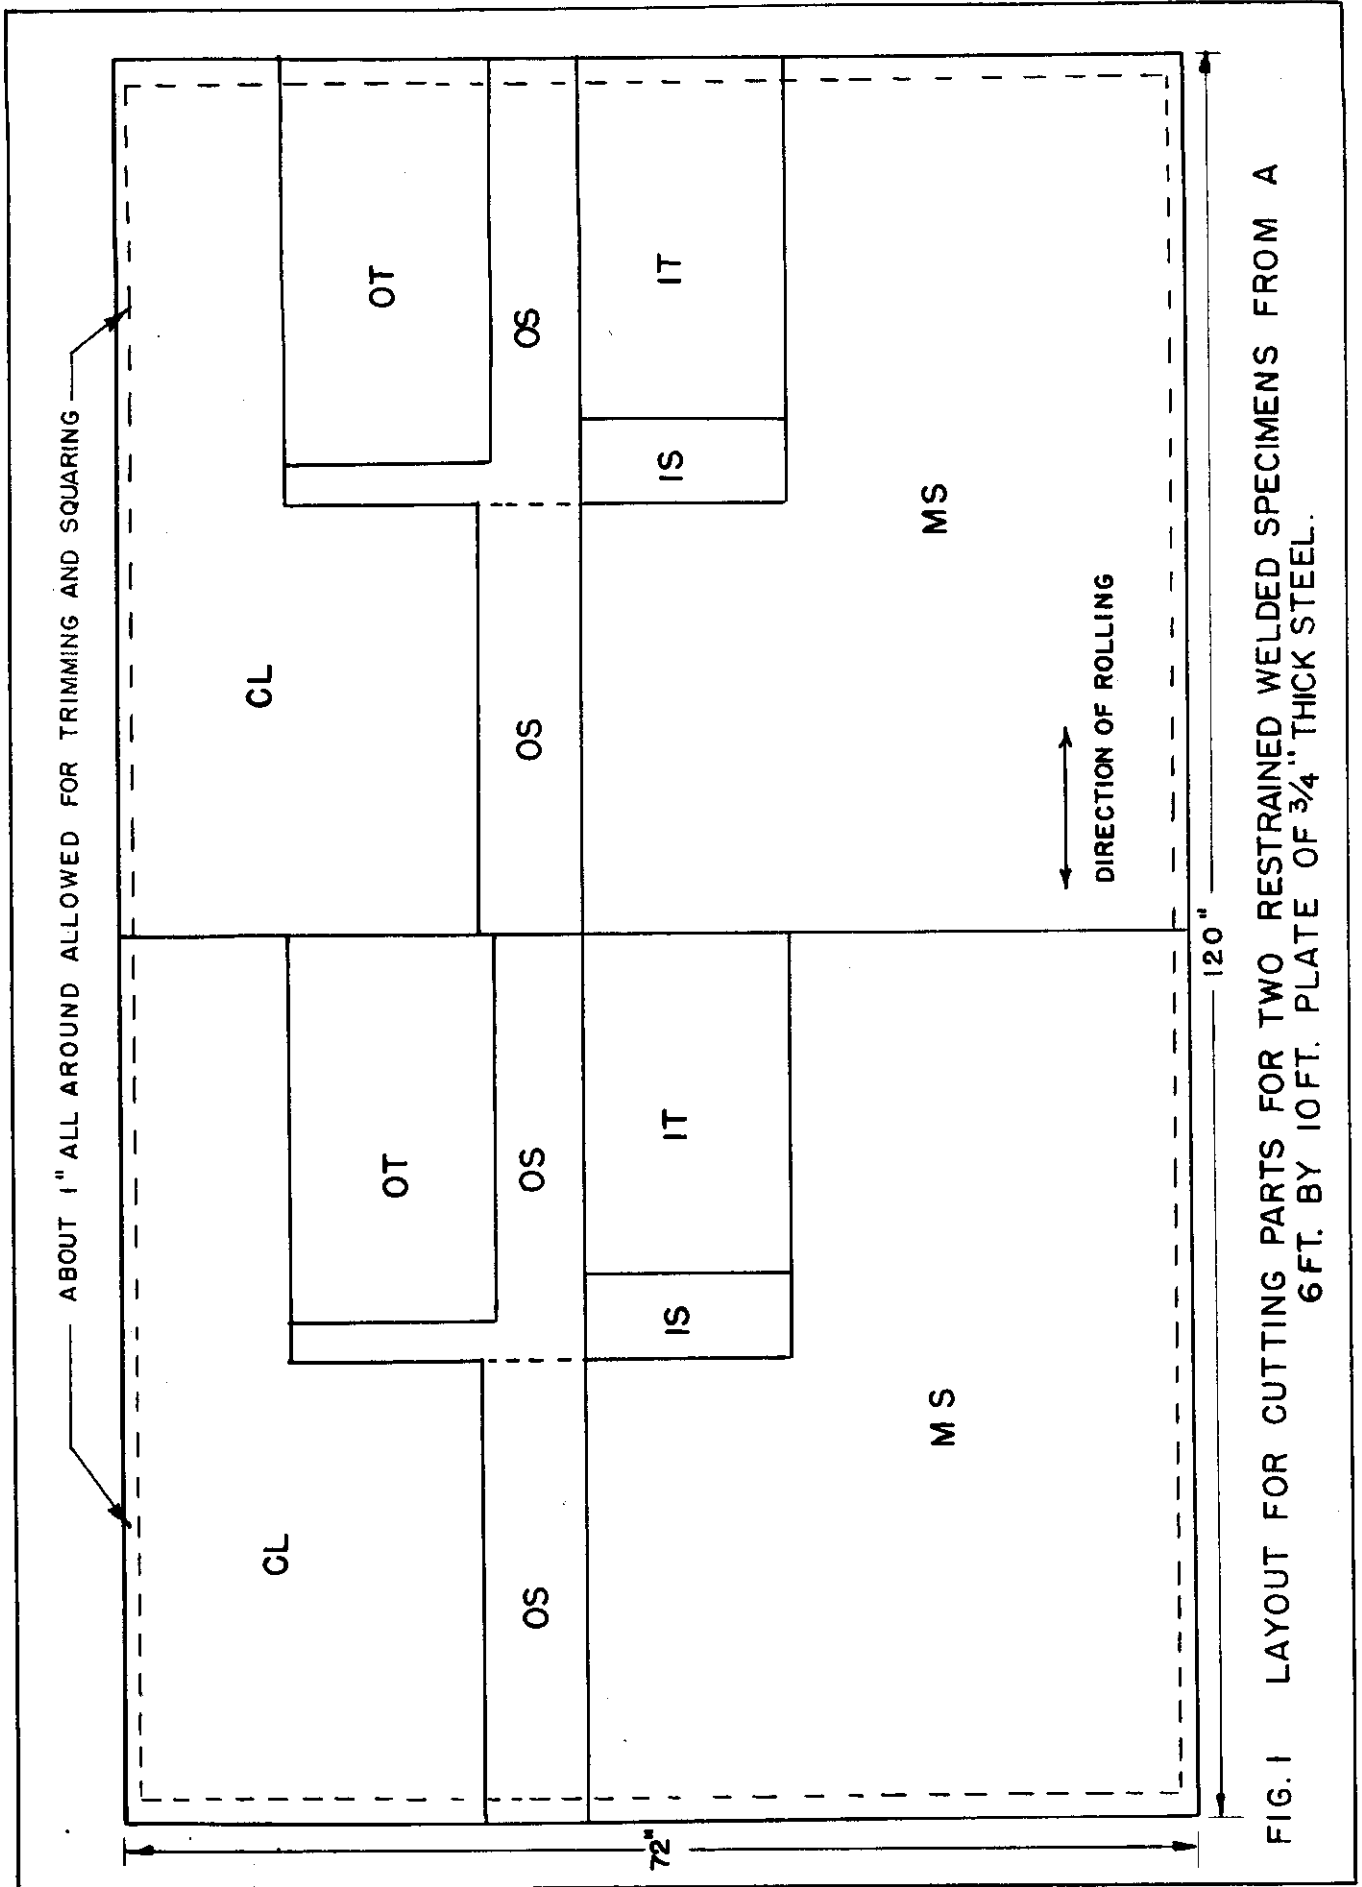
LAYOUT FOR CUTTING PARTS FOR TWO RESTRAINED WELDED SPECIMENS FROM A 6 FT. BY 10 FT. PLATE OF 3/4" THICK STEEL.
